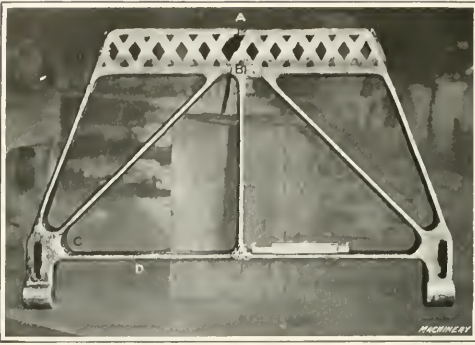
Foot-treadle illustrating Difficulties in Welding
